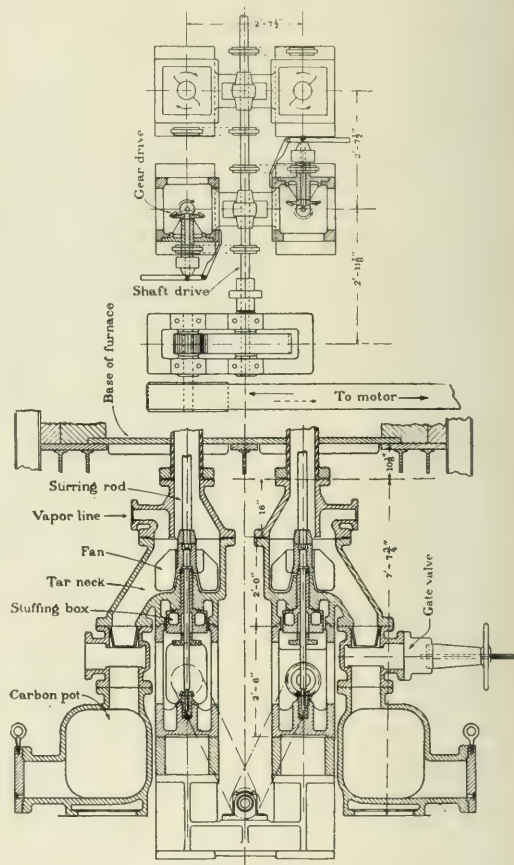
FIG. VI—DETAILS OF STIRRING ROD DRIVE AND TAR NECK
